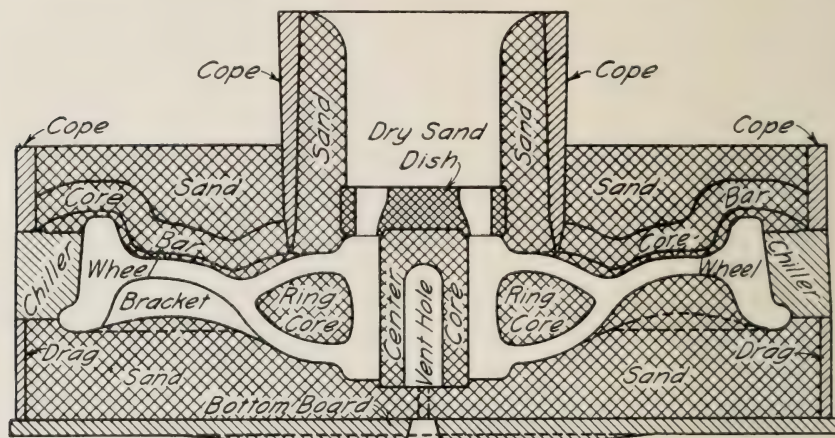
CROSS SECTION OF A CAR WHEEL MOLD
